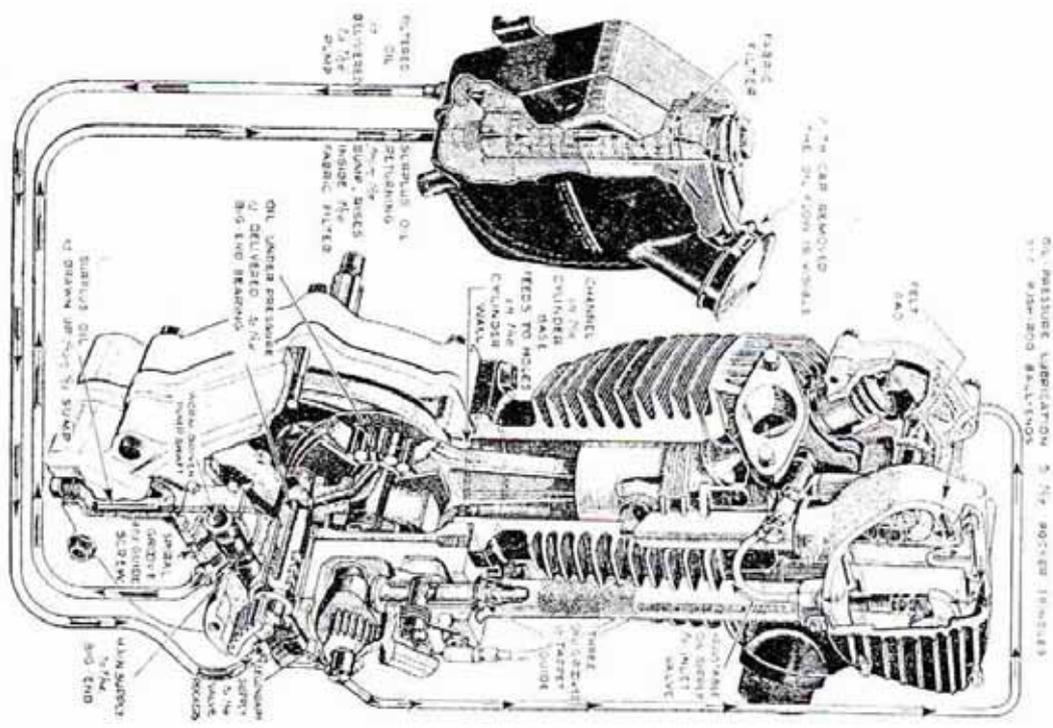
ENGINE LUBRICATION SYSTEM WITH DIRECT OIL-FEED FROM PUMP TO ROCKING-GEAR.
